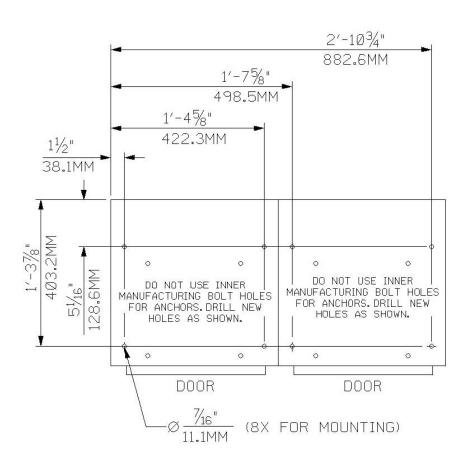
Mounting Hole Locations 1x1 Cylinder Cabinet or 1x1 Cylinder Euro Cabinet
